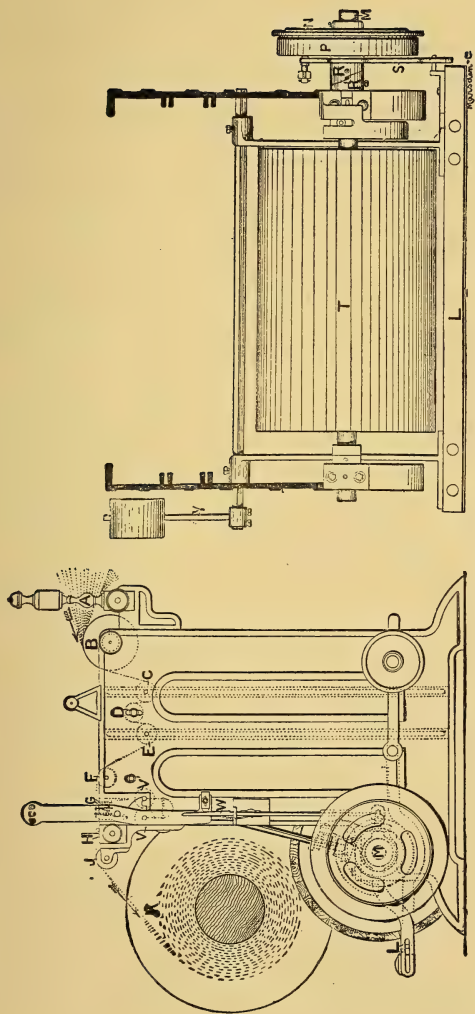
BEAMING MACHINE; SIDE ELEVATION; PLAN.
